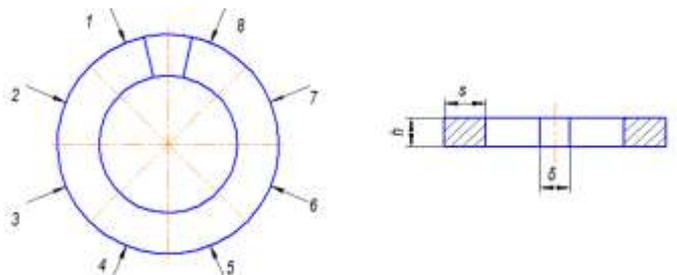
Technology for measuring the friction surfaces of the piston ring
